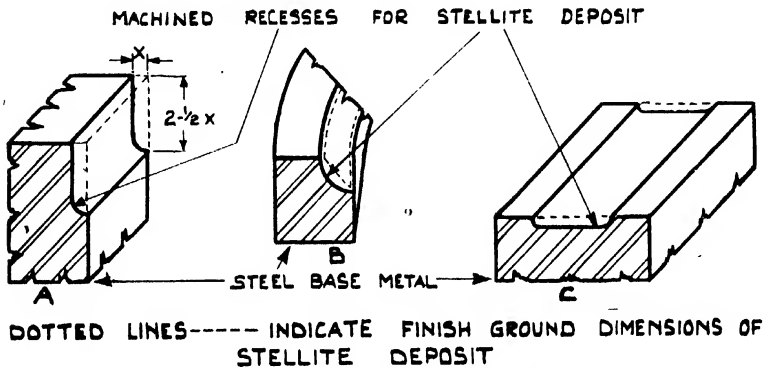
METHODS OF PREPARING METAL SURFACES
